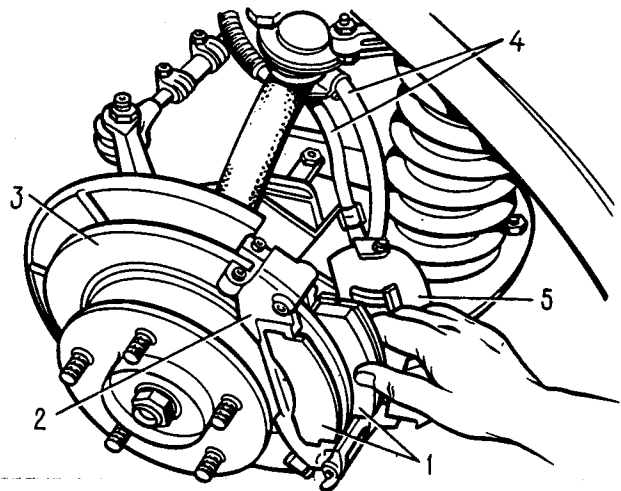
Replacing Brake Shoes: 1 - brake shoes; 2 - shoe guide; 3 - brake disc; 4 - brake hoses; 5 - cylinder block (assembled with caliper)
